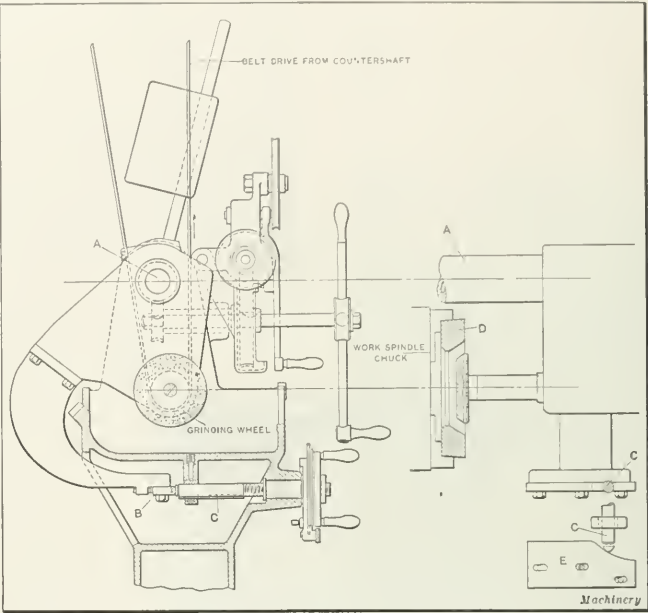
Bryant Chucking Grinder equipped with Formed Control Plate for the Performance of Die-grinding Operations
